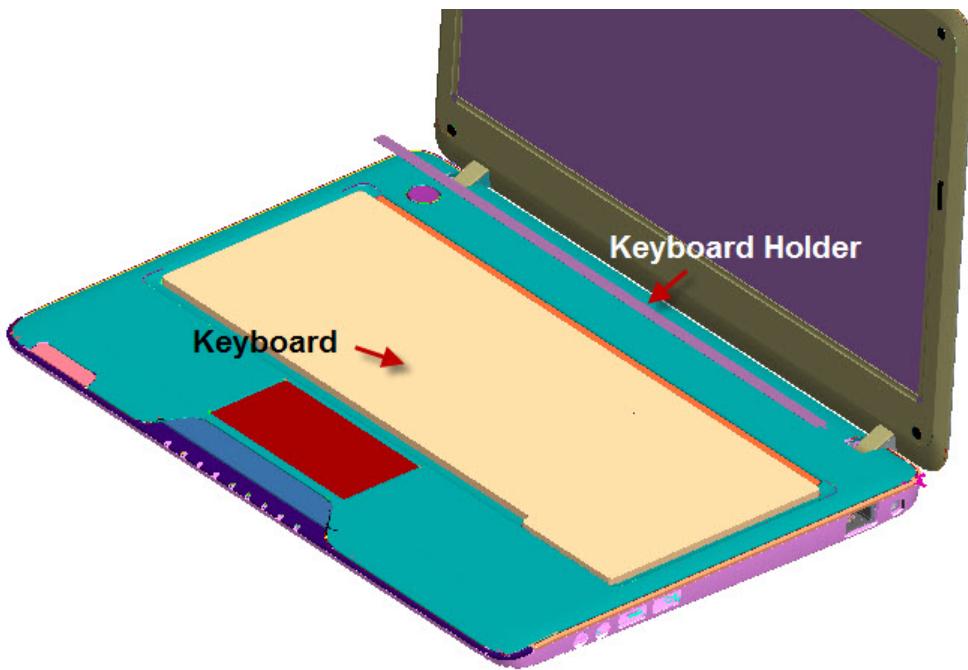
Remove Keyboard Holder and Keyboard
